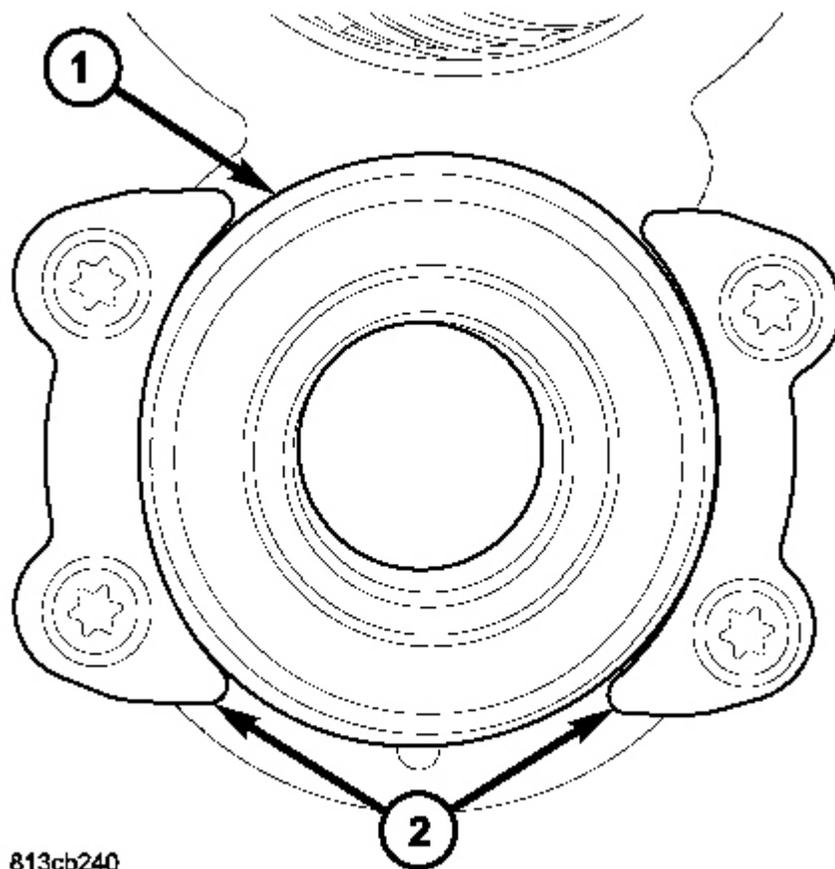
Identifying Input Shaft Retainer Bolts & Retainer
